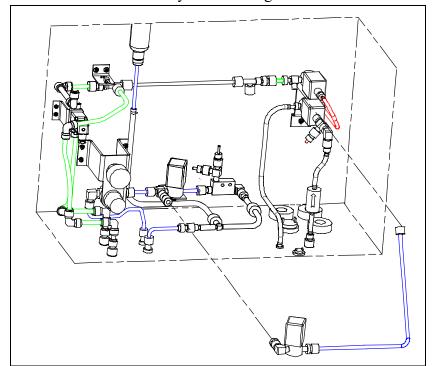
Solenoid Valve D/Tubing Assembly Removal for Aspirator Replacement
